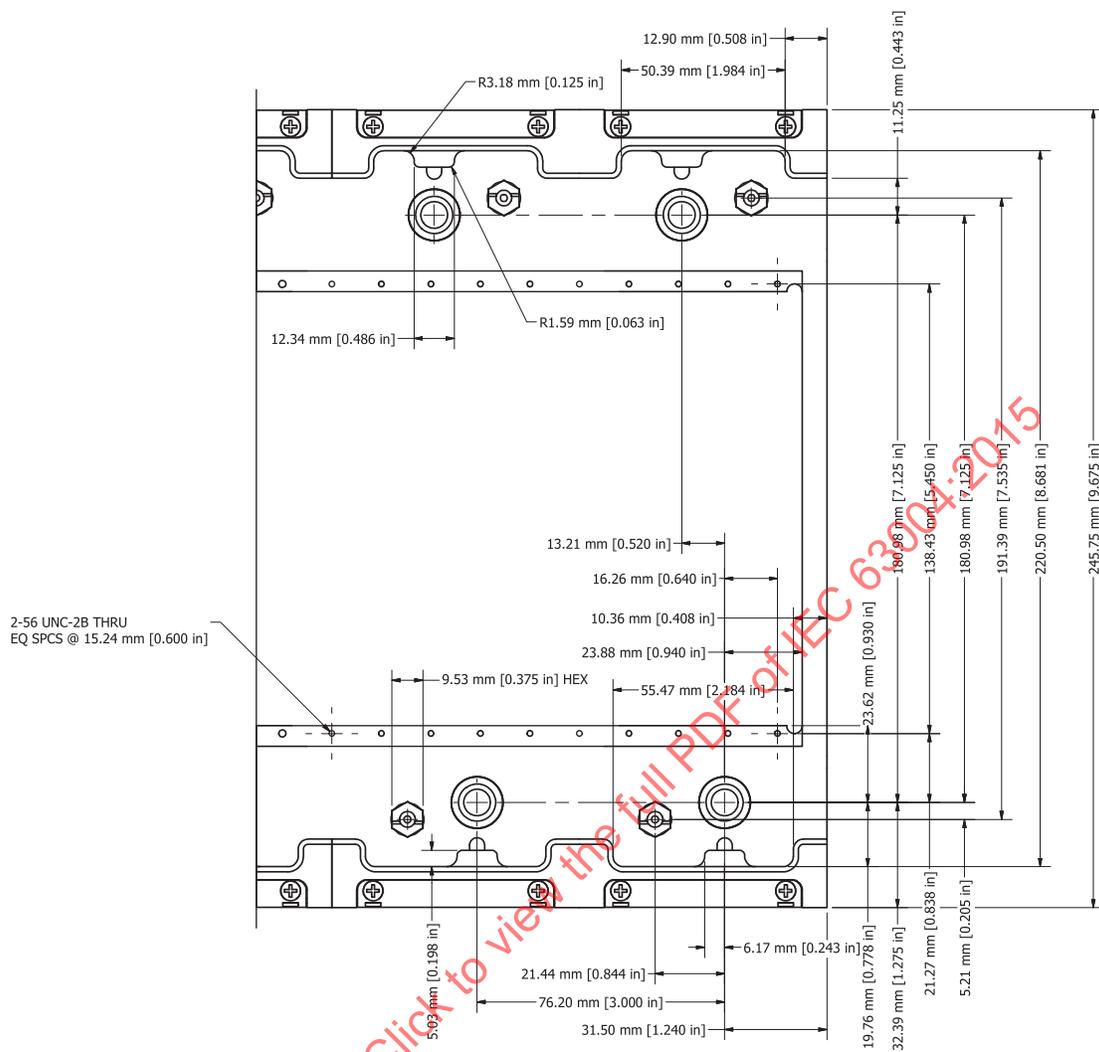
Continuous framework receiver layout design, top view, with connector mount spacing at 15.24 mm (0.60 in) slot spacings without frame rib at 76.2 mm (3.0 in) spacings
